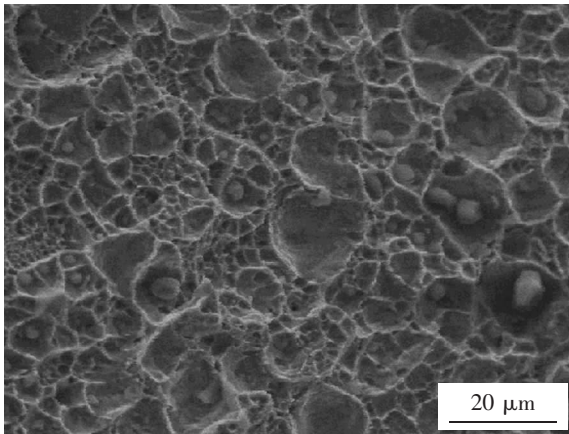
The bend samples fractography of joint with traditional TLP bonding
